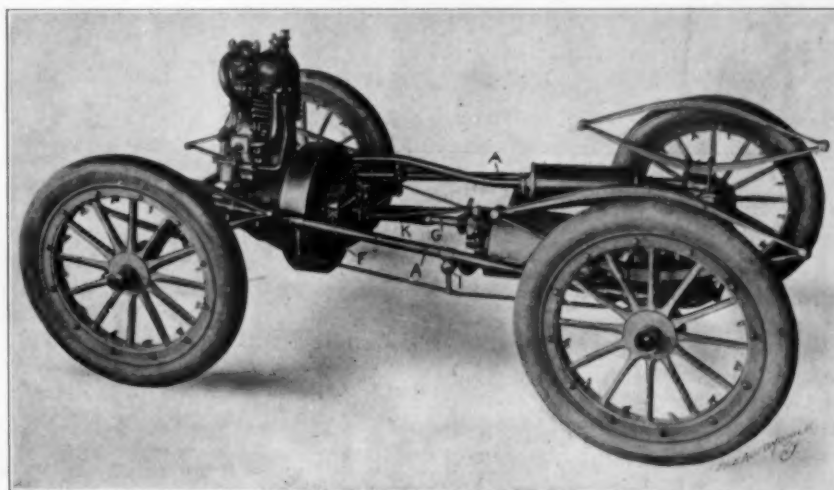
THE RUNNING GEAR AND MACHINERY.
